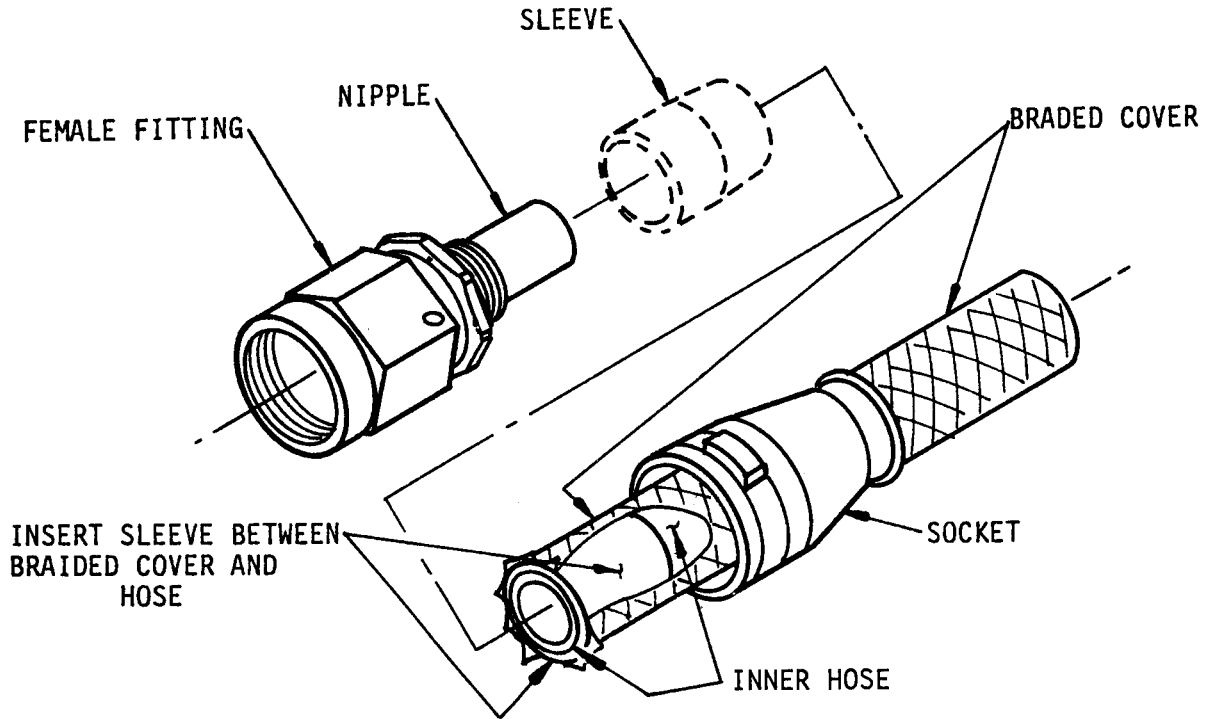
Installation of MS Hose Fitting Socket and Sleeve
